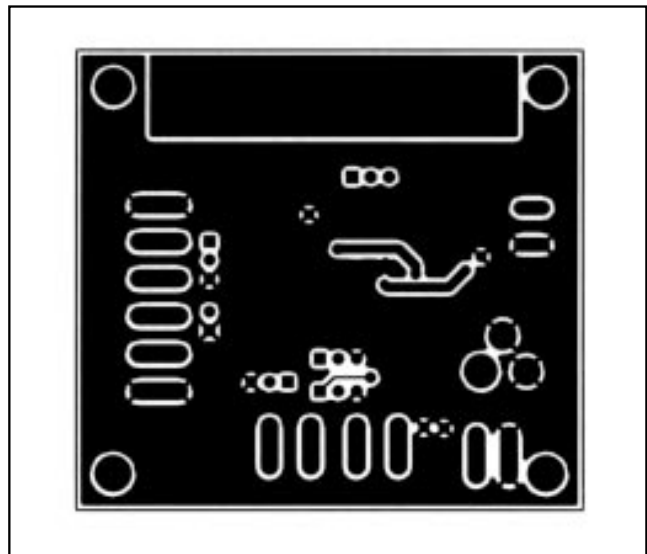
MAX846A EV Kit PC Board Layout—Solder Side
